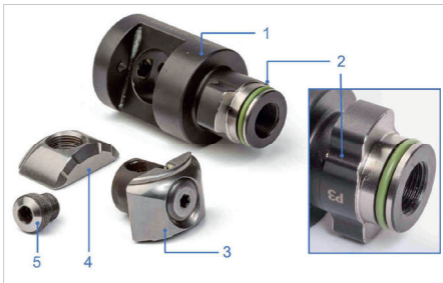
Detailed view of KS clamping cartridge in the MQL design
